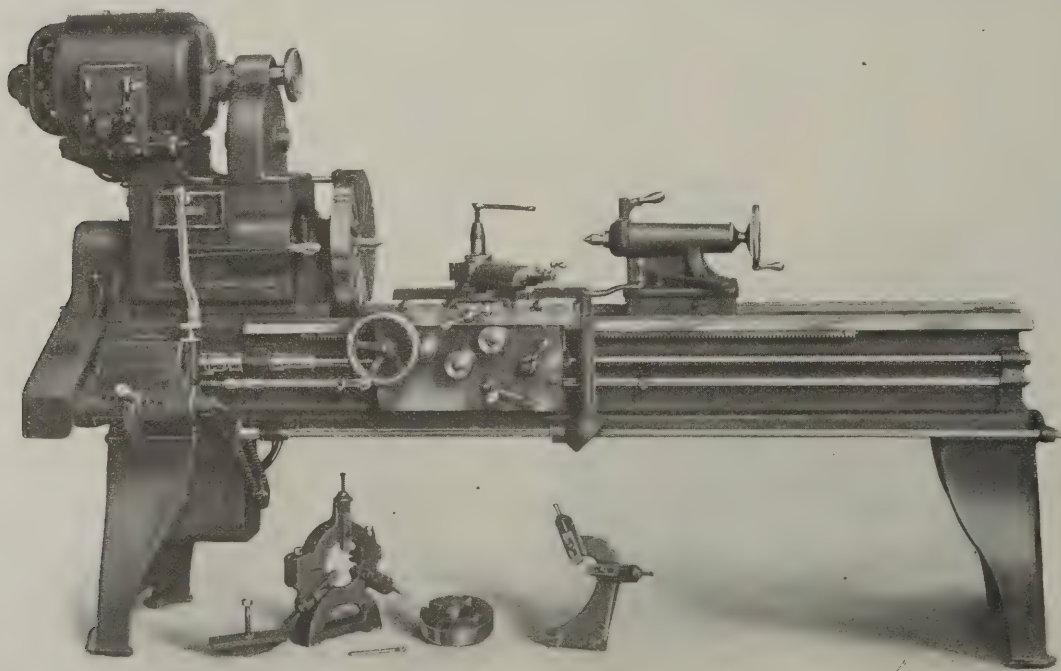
Motor-driven Lathe built by the Champion Tool Works Co.
